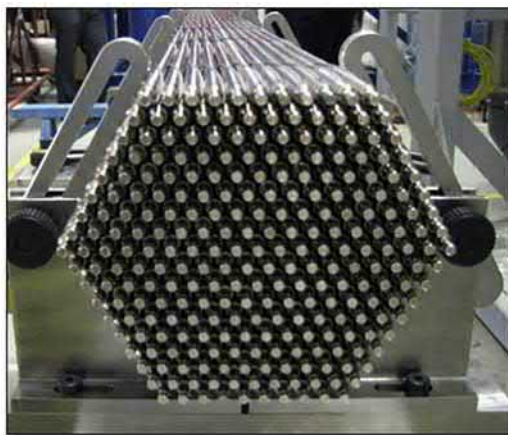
Photo showing the top end of a mock-up fuel bundle for a Traveling Wave Reactor fuel assembly. This rod bundle is composed of 217 fuel rods, each of which is helically wrapped with a spacer wire. Courtesy TerraPower, LLC.
